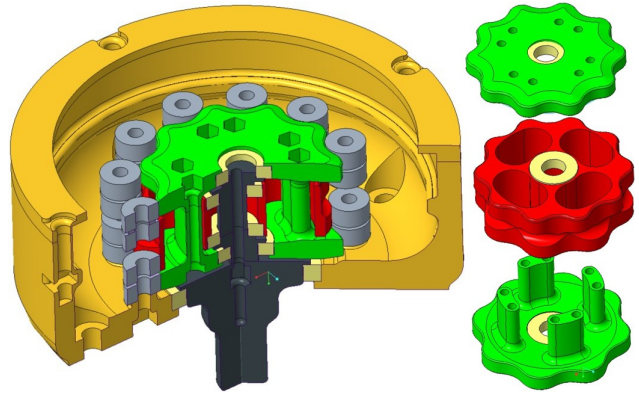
Q-CYC design CAD views. On the left, an internal section view of the proposed prototype. On the right, an exploded view of the two compact-cam cycloidal disk pairs that assemble in the quadruple-disk architecture.
